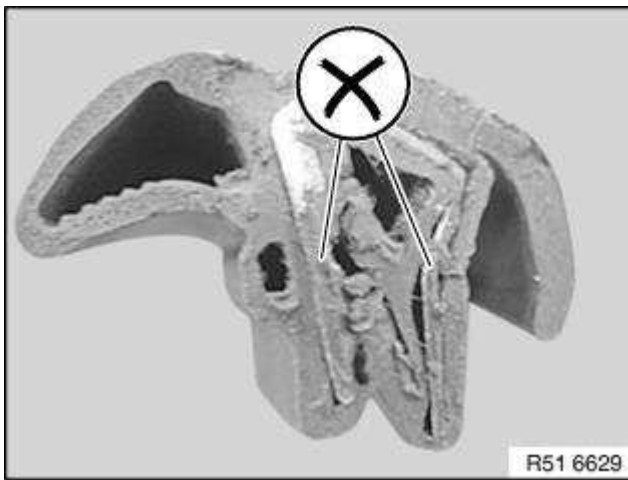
Identifying Sides Of Seal (Bad Seal)
